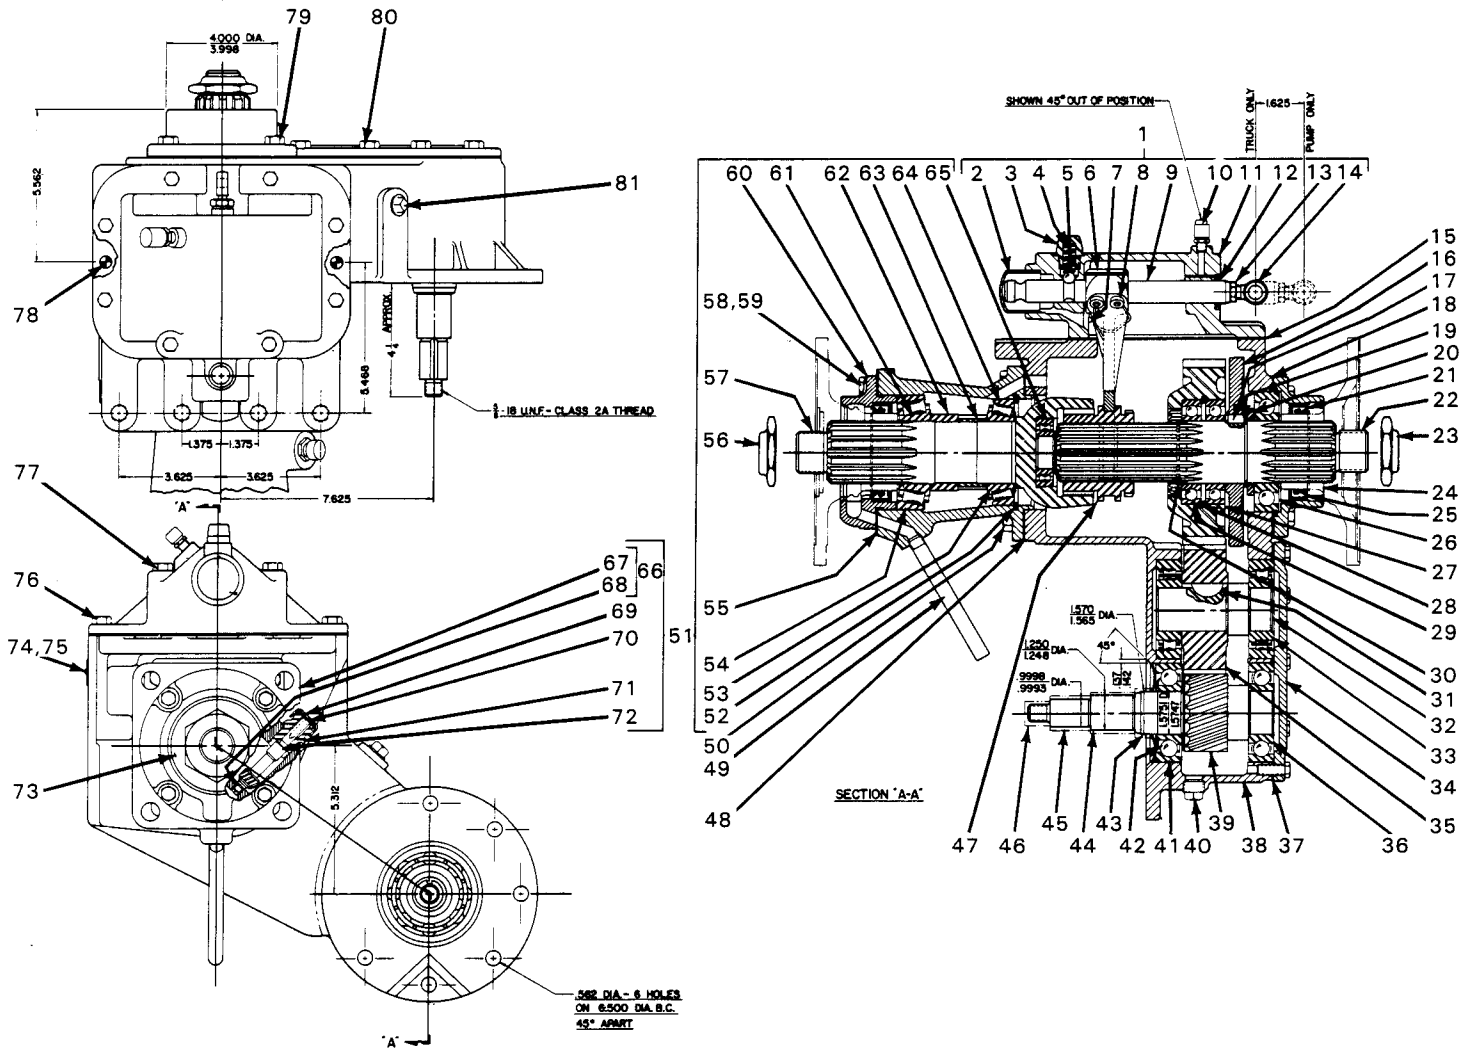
P/N 24571-011 Gear Box Assembly For Pump Model 06D15-GH0
